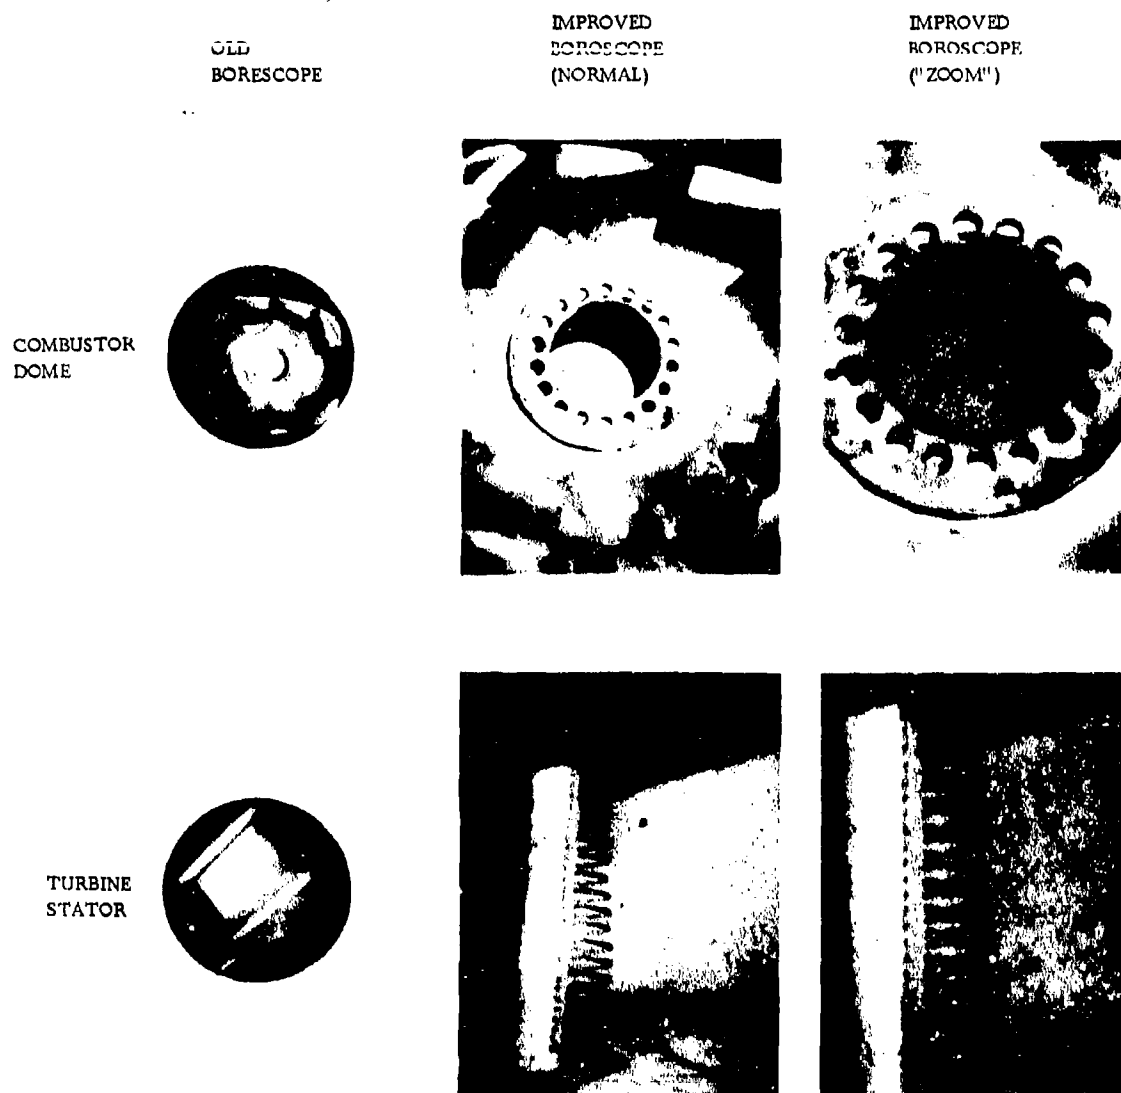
BORESCOPE VIEW INSIDE COMBUSTOR
